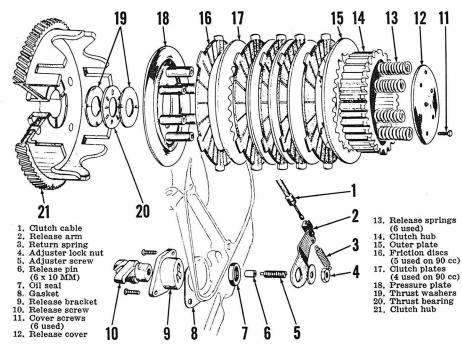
Exploded view of typical clutch assembly. All 50 and 60 cc models use three friction discs (16) and two clutch plates (17). Special thrust washer is used instead of parts (19 & 20) on later models.
